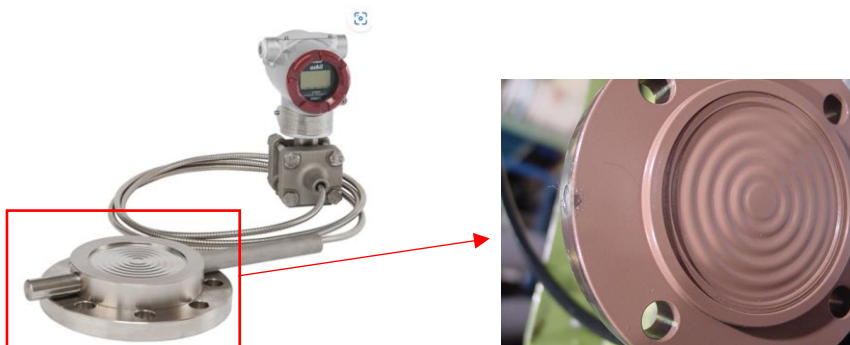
Coating and lining section of parts (diaphragm) in contact with fluid
